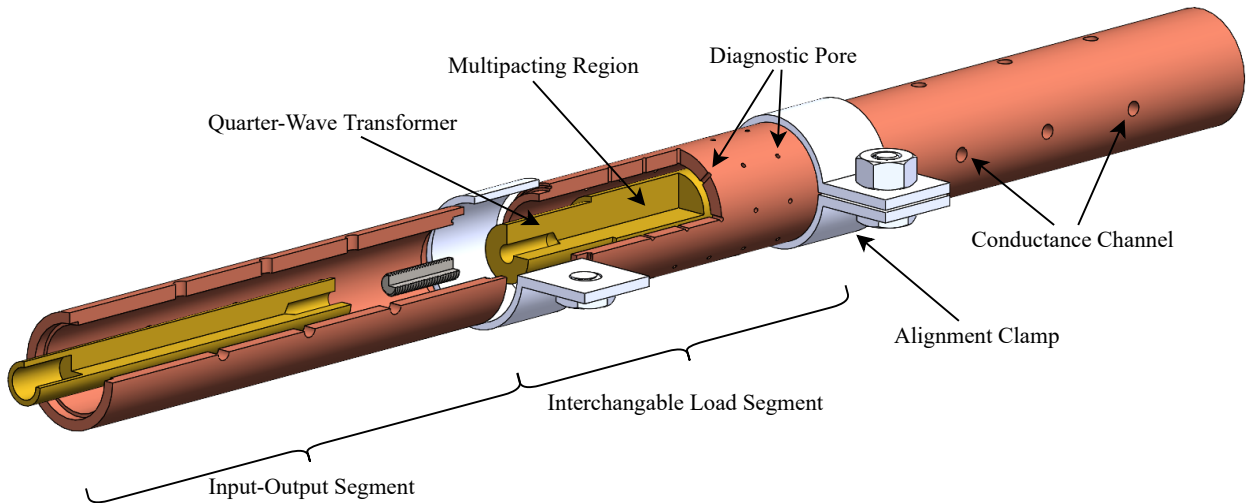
CAD rendering of the coaxial transmission line. Cutaway and exploded views highlight the construction of the segmented inner and outer conductors.
